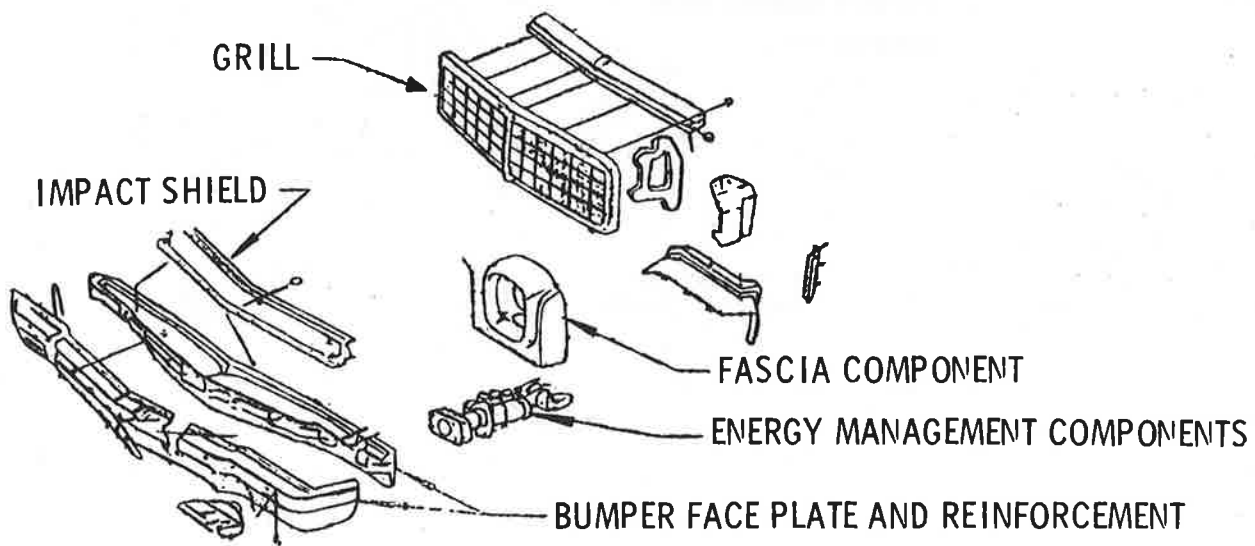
TYPICAL "ALL HARD" SYSTEM EXPLODED VIEW
